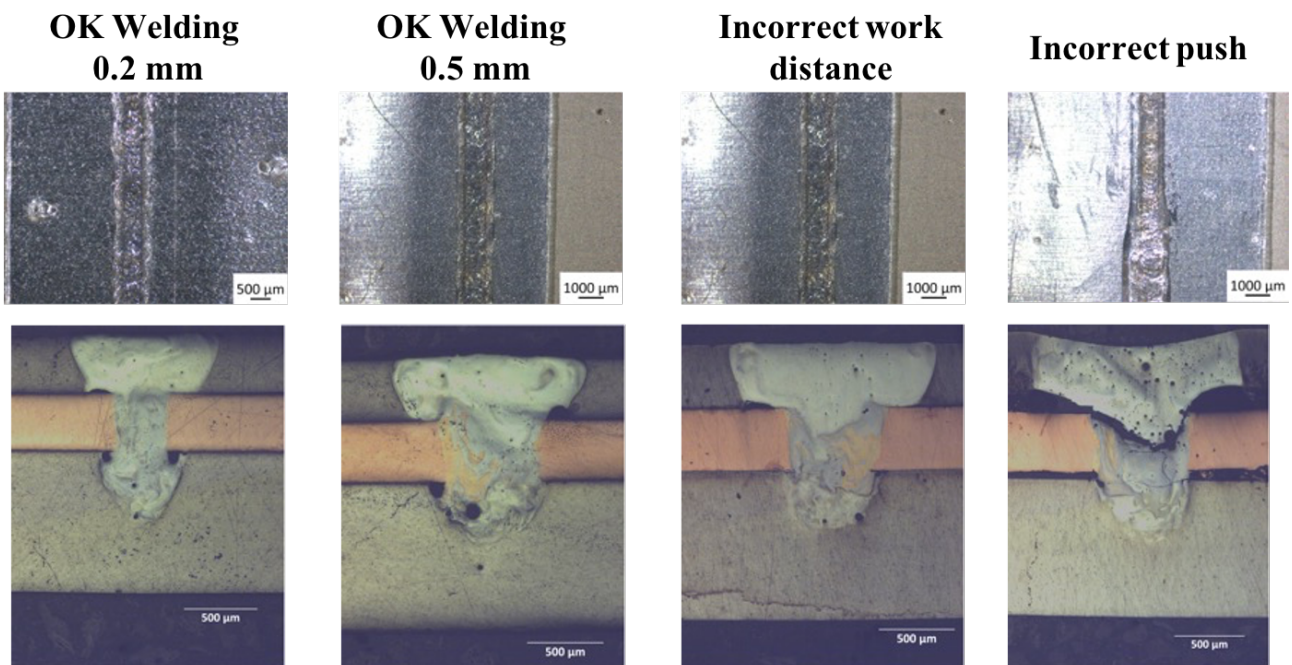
Top and cross section images of welded sample of Al-Cu-Busbar configuration after aging test.
